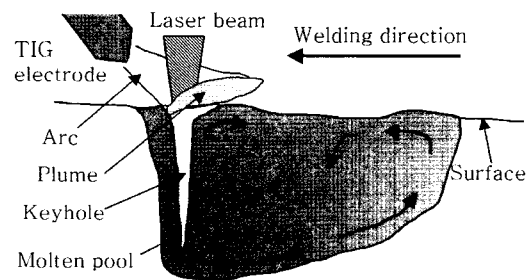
Schematic representation of keyhole and liquid flow in molten pool observed during TIG-YAG hybrid welding of STS304 with SI fiber
